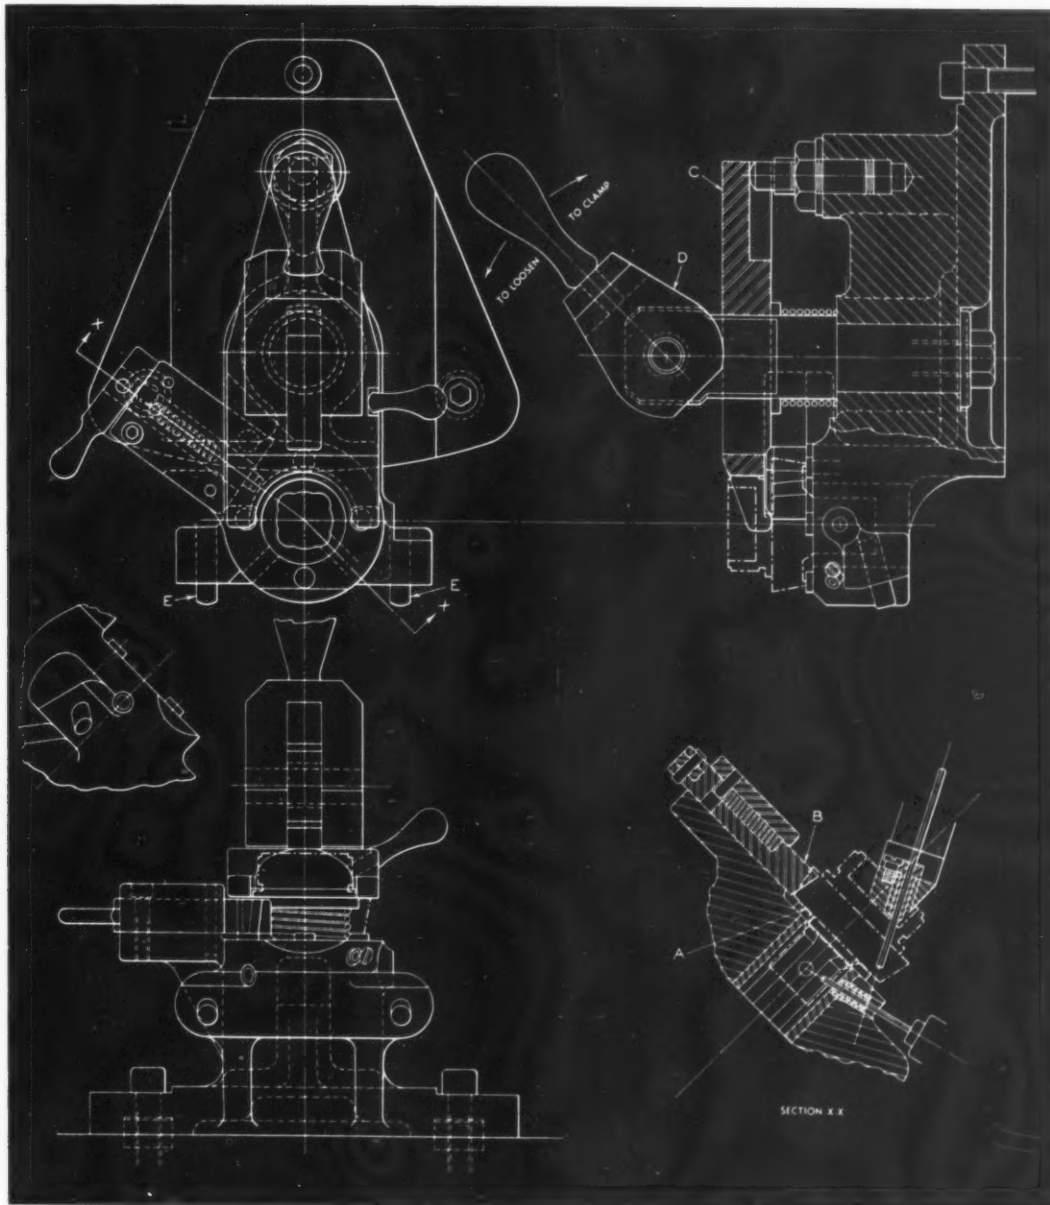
Fixture for Holding Fuse during First Cycle of Operations
